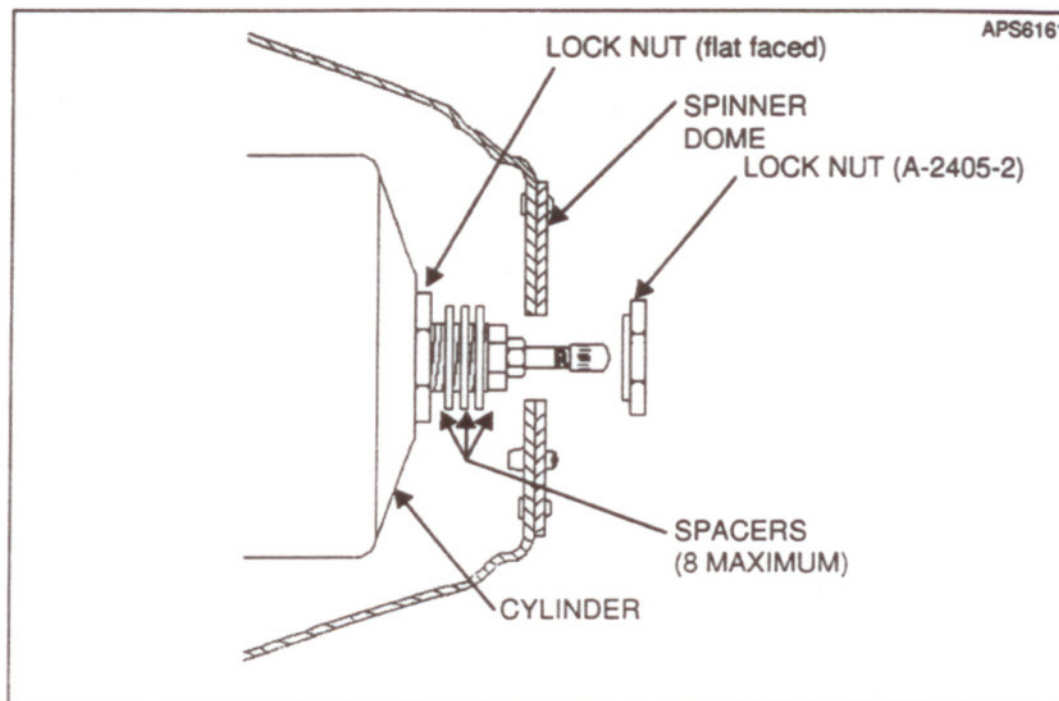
Two-Piece Spinner Mounting (Procedure 2)
